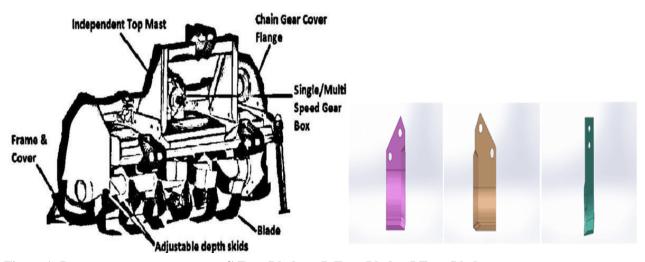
Rotavator C Type Blade L Type Blade J Type Blade
